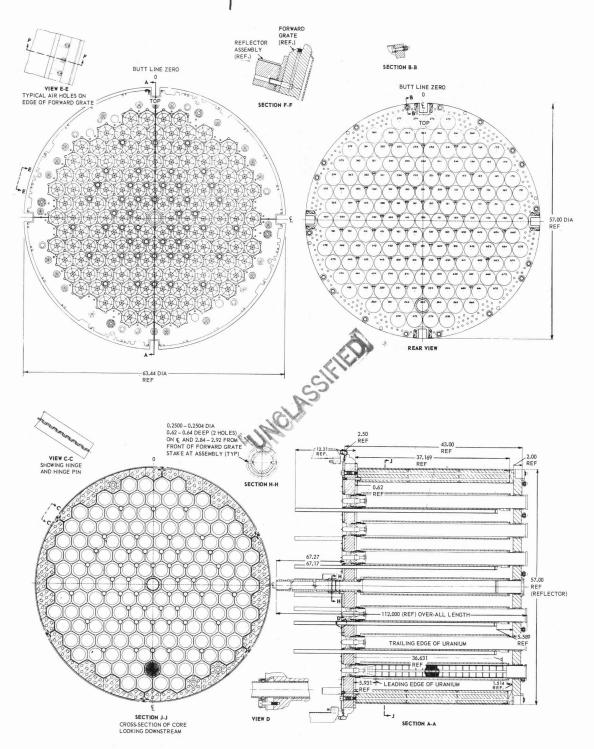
HTRE-3 core assembly (Dwg. 7018R51)
